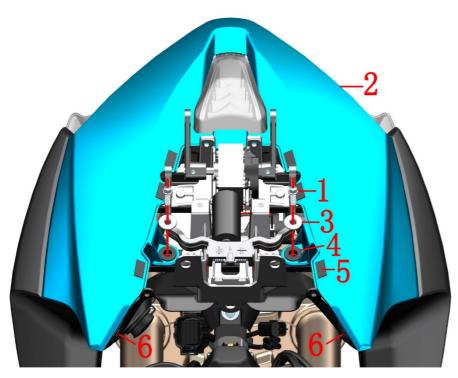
F	RONT FORK	Head cover panel assembly	CHK
